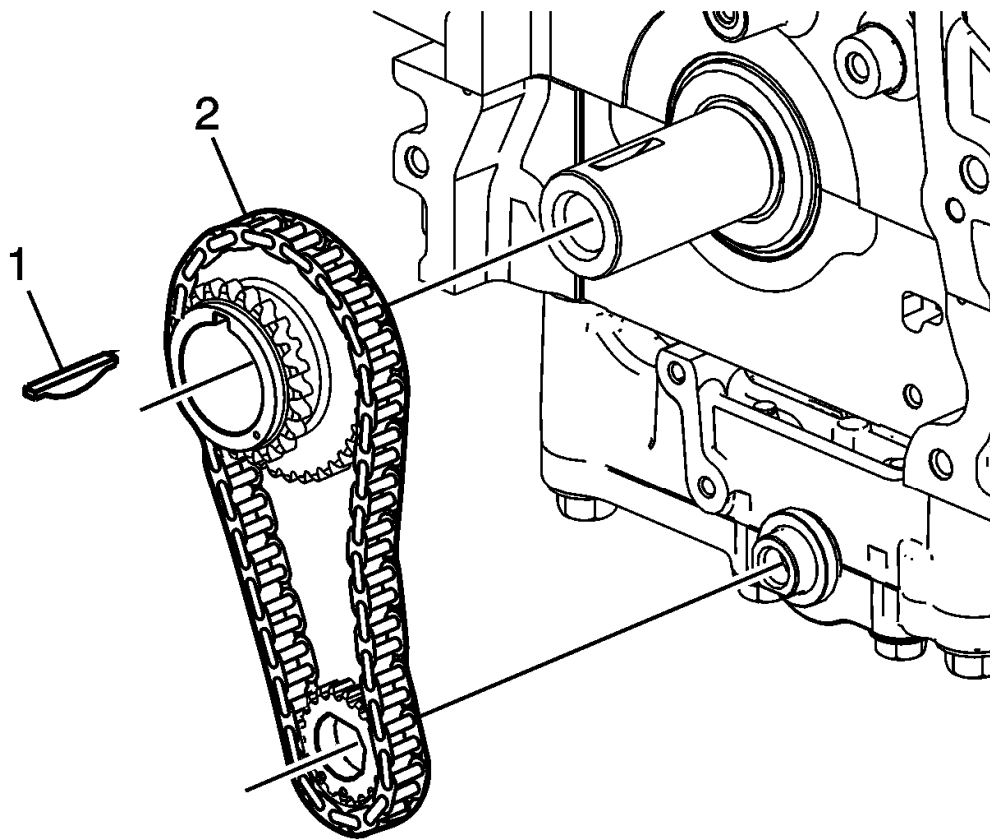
Balancer Shaft Driven Sprocket And Balancer Chain
